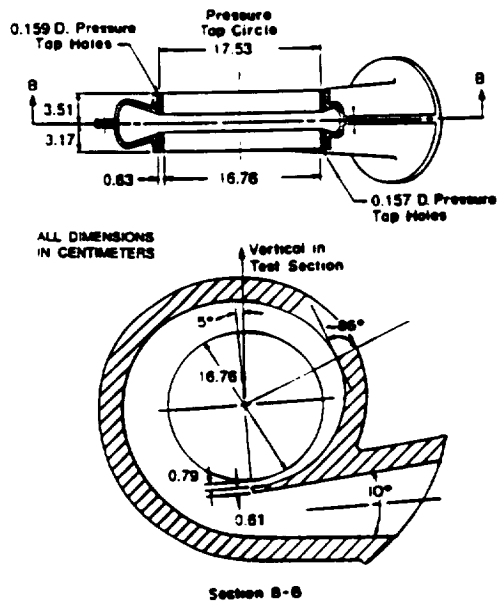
A vaneless spiral volute (designated Volute A) designed to be matched to Impeller X.
